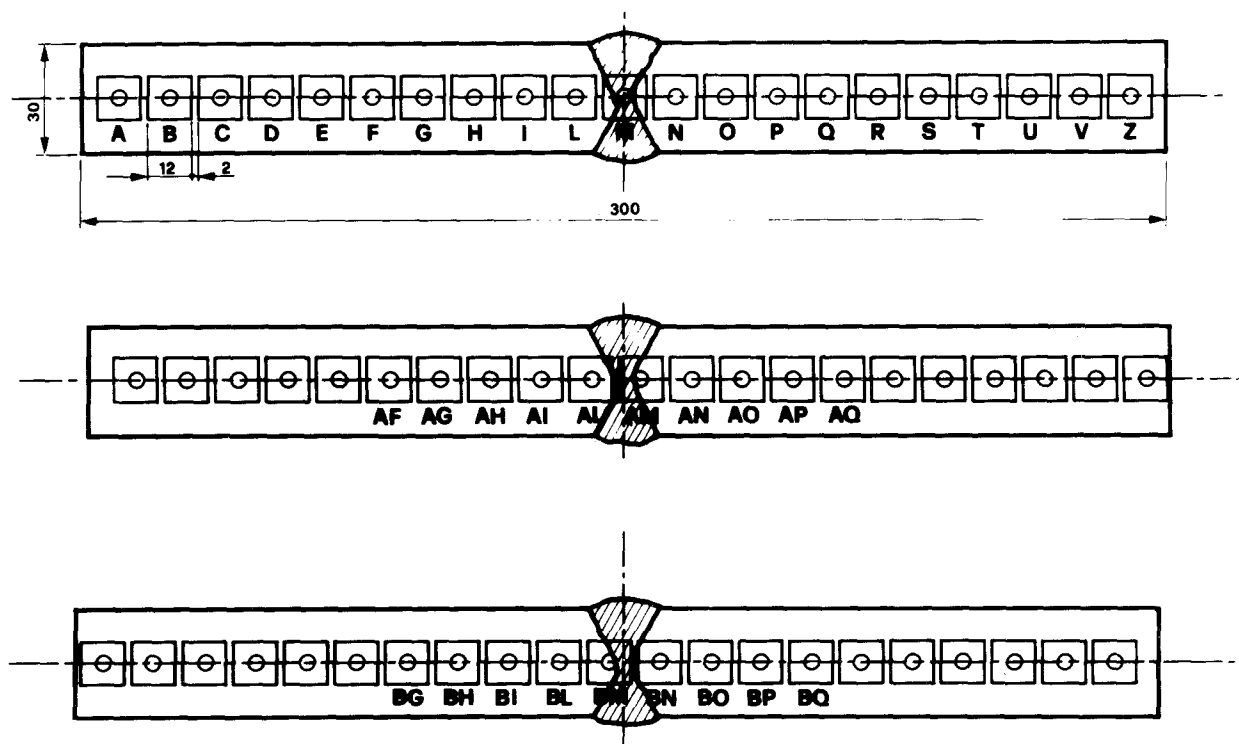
Sections of welded joint of 10Cr-17.5Mn austenitic steel plates showing sampling location of longitudinal-to-weld specimens. Shaded area represents weld metal. Dimensions in millimetres.
